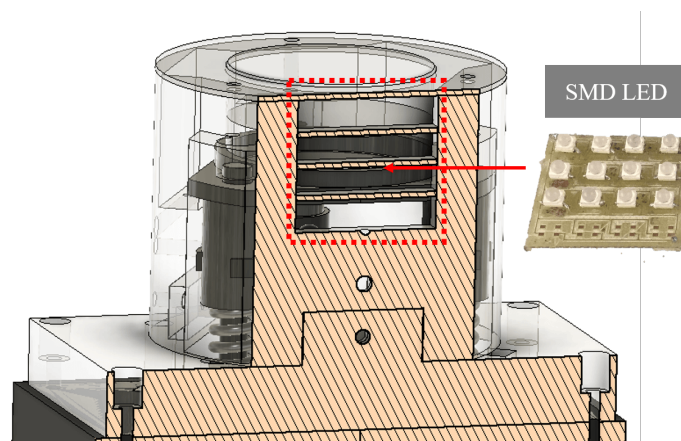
CAD drawing of the illumination system within the F-TOUCH0 sensor. Three colours (red, green and blue) of SMD LEDs, each with 12 pieces, are soldered within three individual PCBs, and the PCBs are installed inside the preserved holes within the 3D printed sensor shell.
